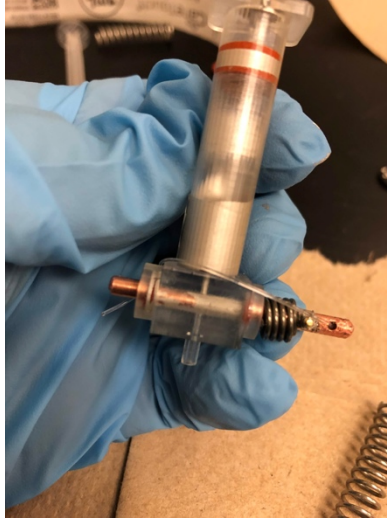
Ink ‘backflowing’ into nozzle body during assembly.
